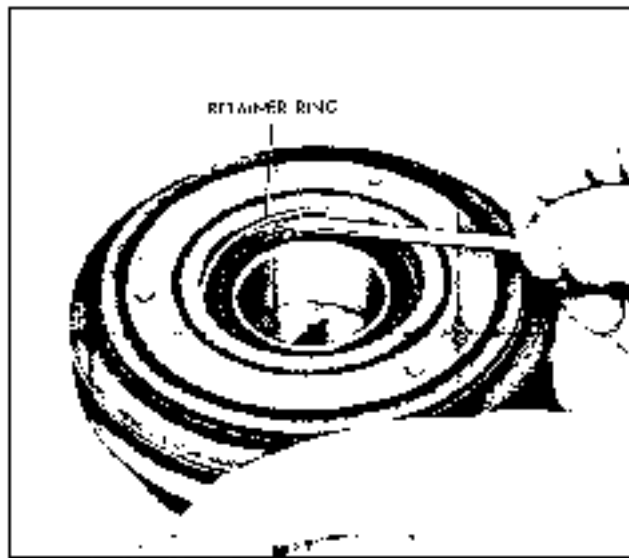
A-10 Removing Pulley Bearing Retainer Ring
